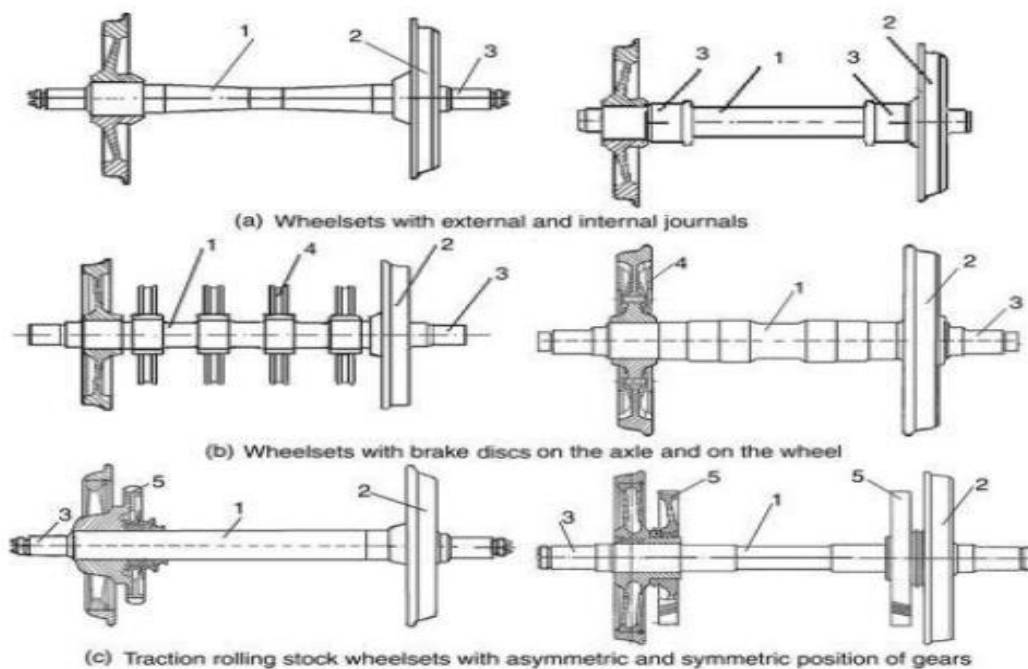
Main type of wheel set design: (a) with external and internal journals; (b) with brake discs on the axle and on the wheel; (c) with asymmetric and symmetric position of gears (1, axle; 2, wheel; 3, journal; 4, brake disc; 5, tooth gear) [26].
